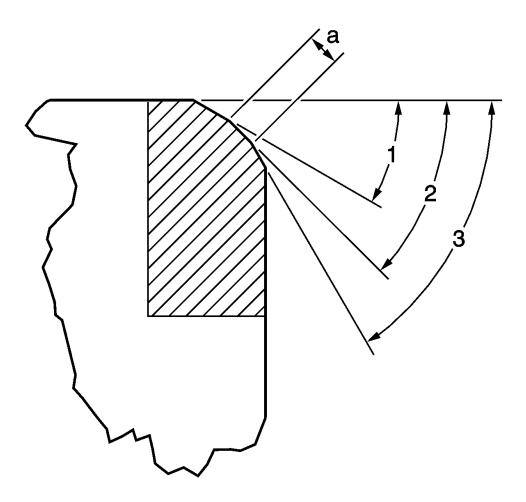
Valve Seating Surface Angle Courtesy of GENERAL MOTORS COMPANY
